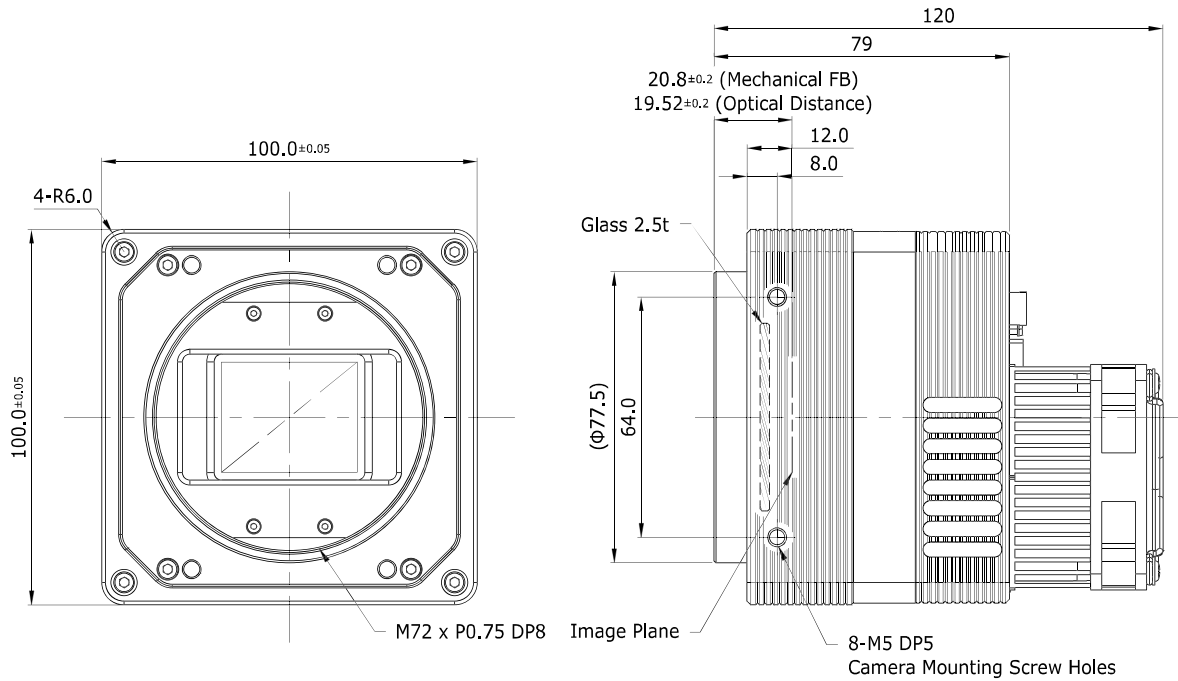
VP-103MC-M/C7I Mechanical Dimension
